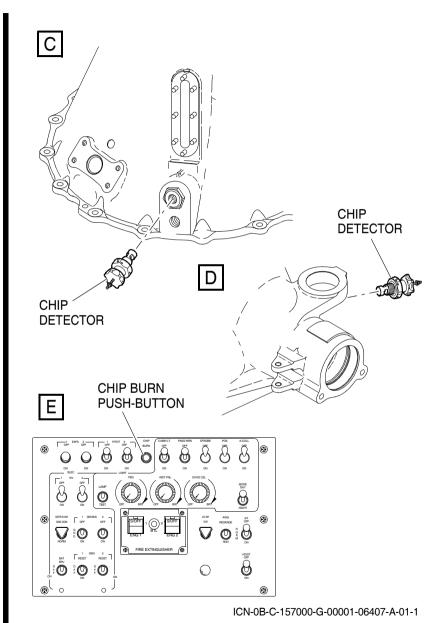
A Chip Burner System - Component Location (Sheet 2 of 2)
